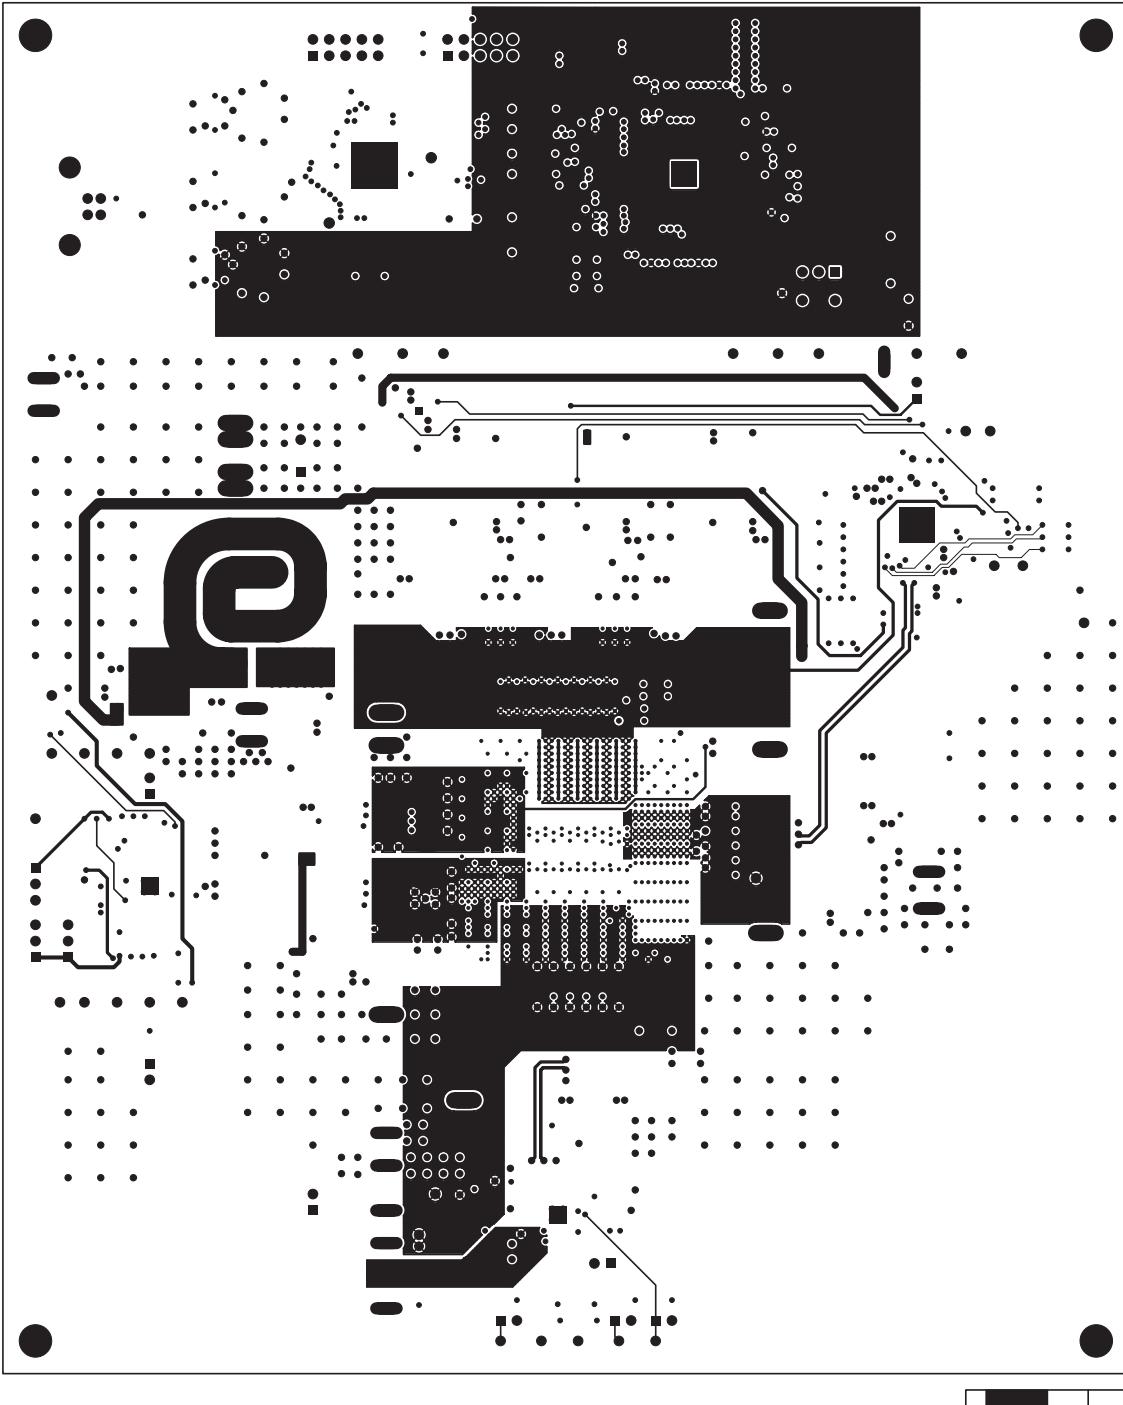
MAX17039 EV Kit PCB Layout—Internal Layer 6 (Signal Layer)
